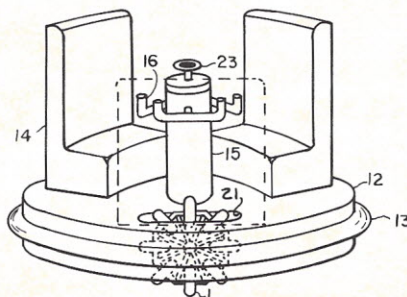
A perspective view of a bumper car. One seat has been removed to show how a wheel is positioned.
